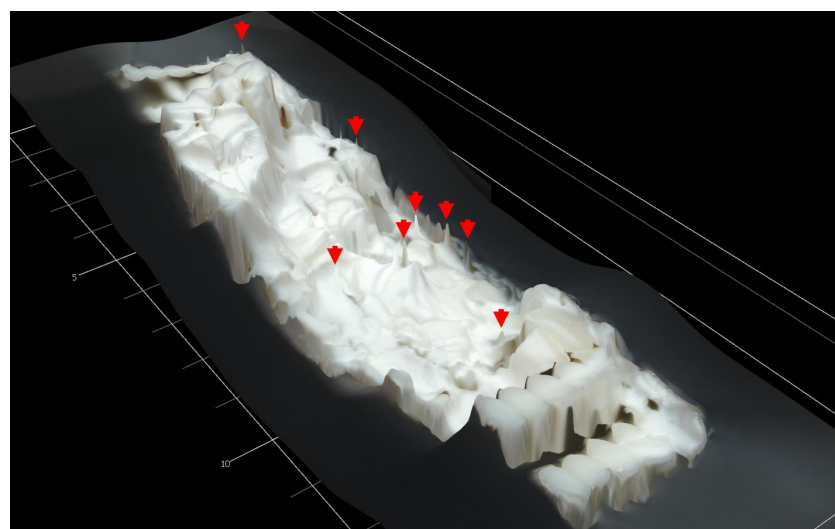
3-D scan of fracture surface of single-material ULTEM 9085 part. Conical shapes formed by necking during plastic strain shown by red arrows.
